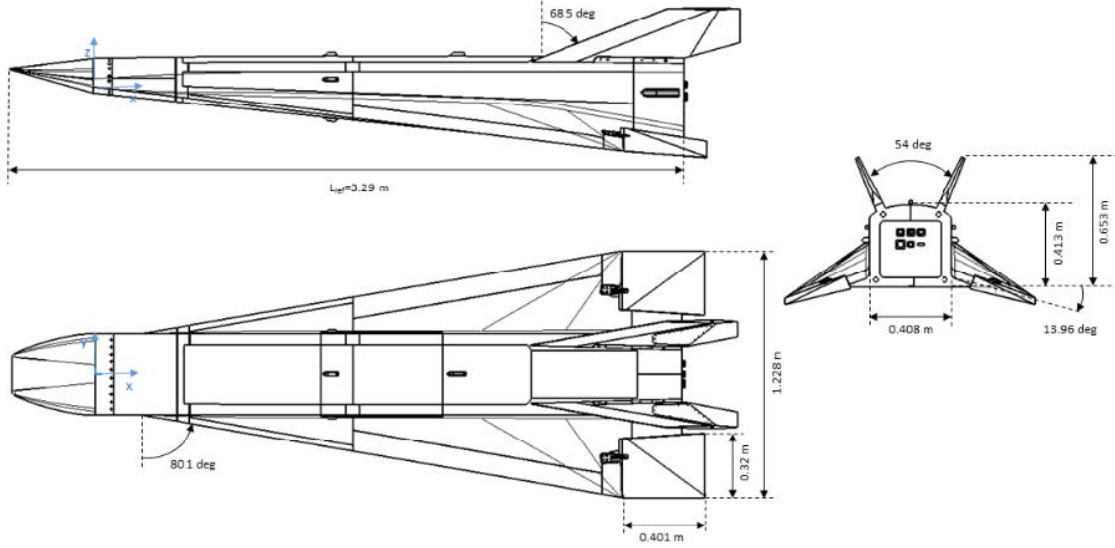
Three-view Hexafly EFTV drawing showing vehicle dimensions [116]
